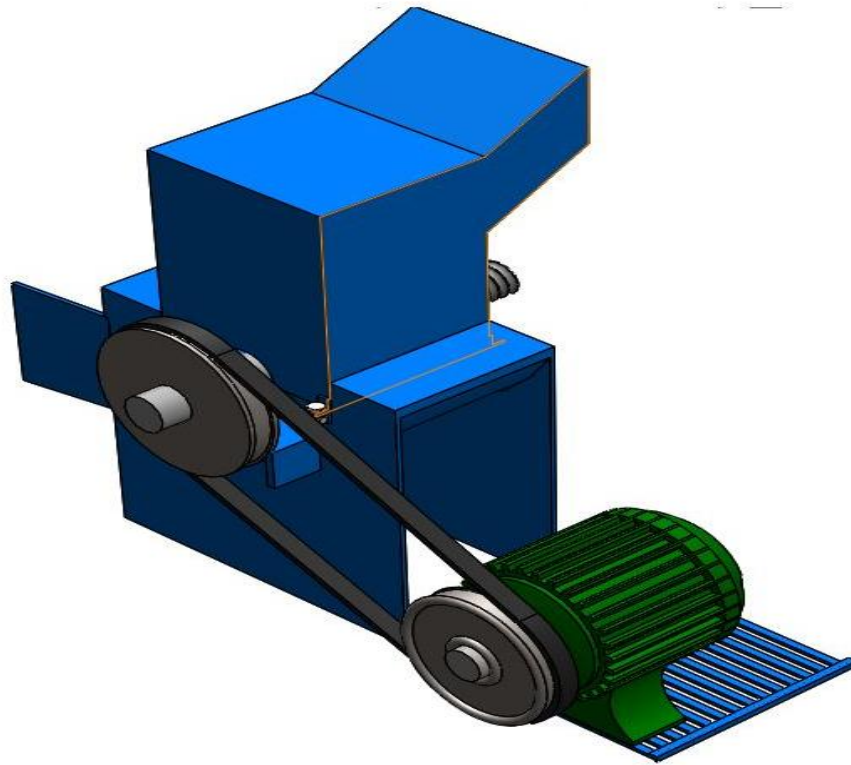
Isometric view of design concept two Second (Rotary blade against a fixed blade)
